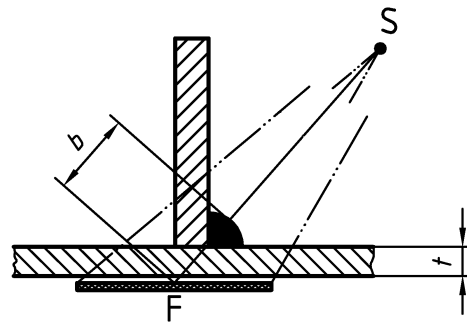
Test arrangement for penetration of fillet weld with the radiation source located on the same side as the weld
